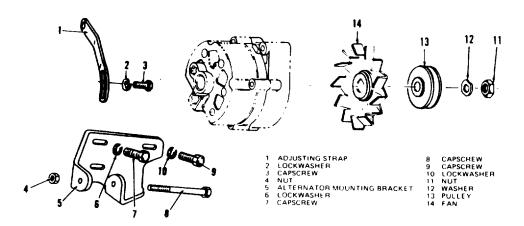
Alternator and attaching parts (Army Model MHE 223).
